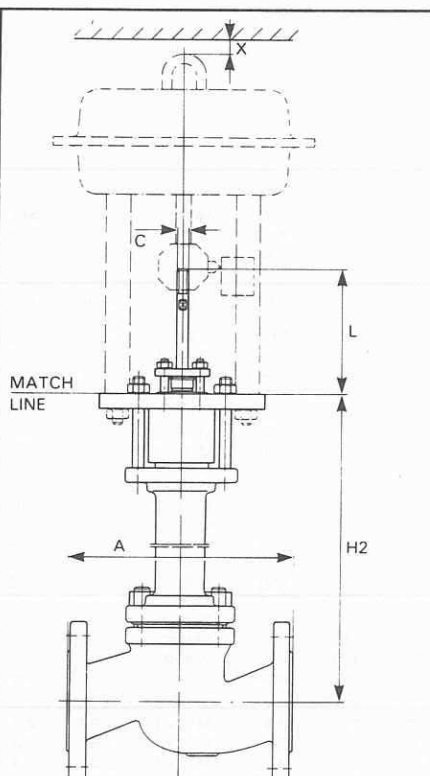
Valve bellows seal bonnet or with plain extension bonnet
